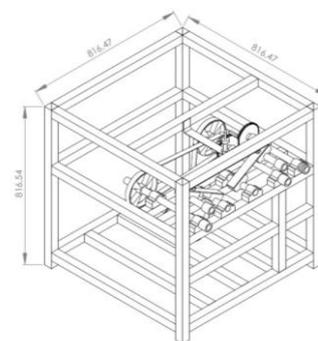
Drawing of coating and rolling machine ขั้นตอนการสร้างเครื่อง
